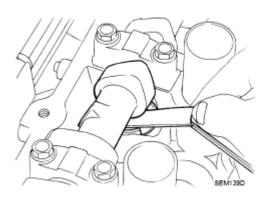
Checking Clearance Between Valve Lifter And Camshaft
